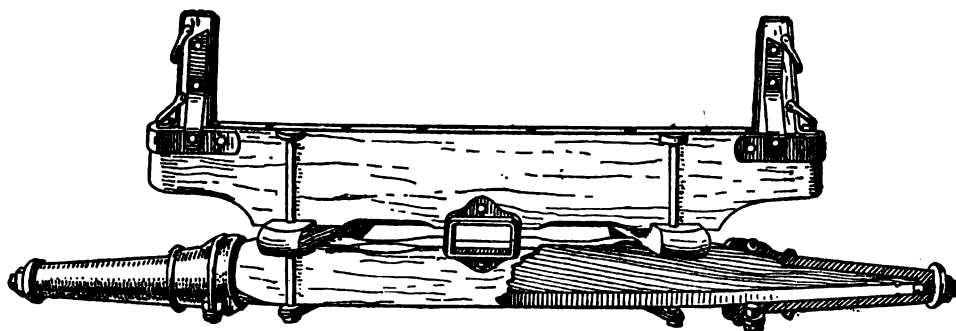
Thimble skein hind gear, a sectional view of part of it showing axle reinforcement
